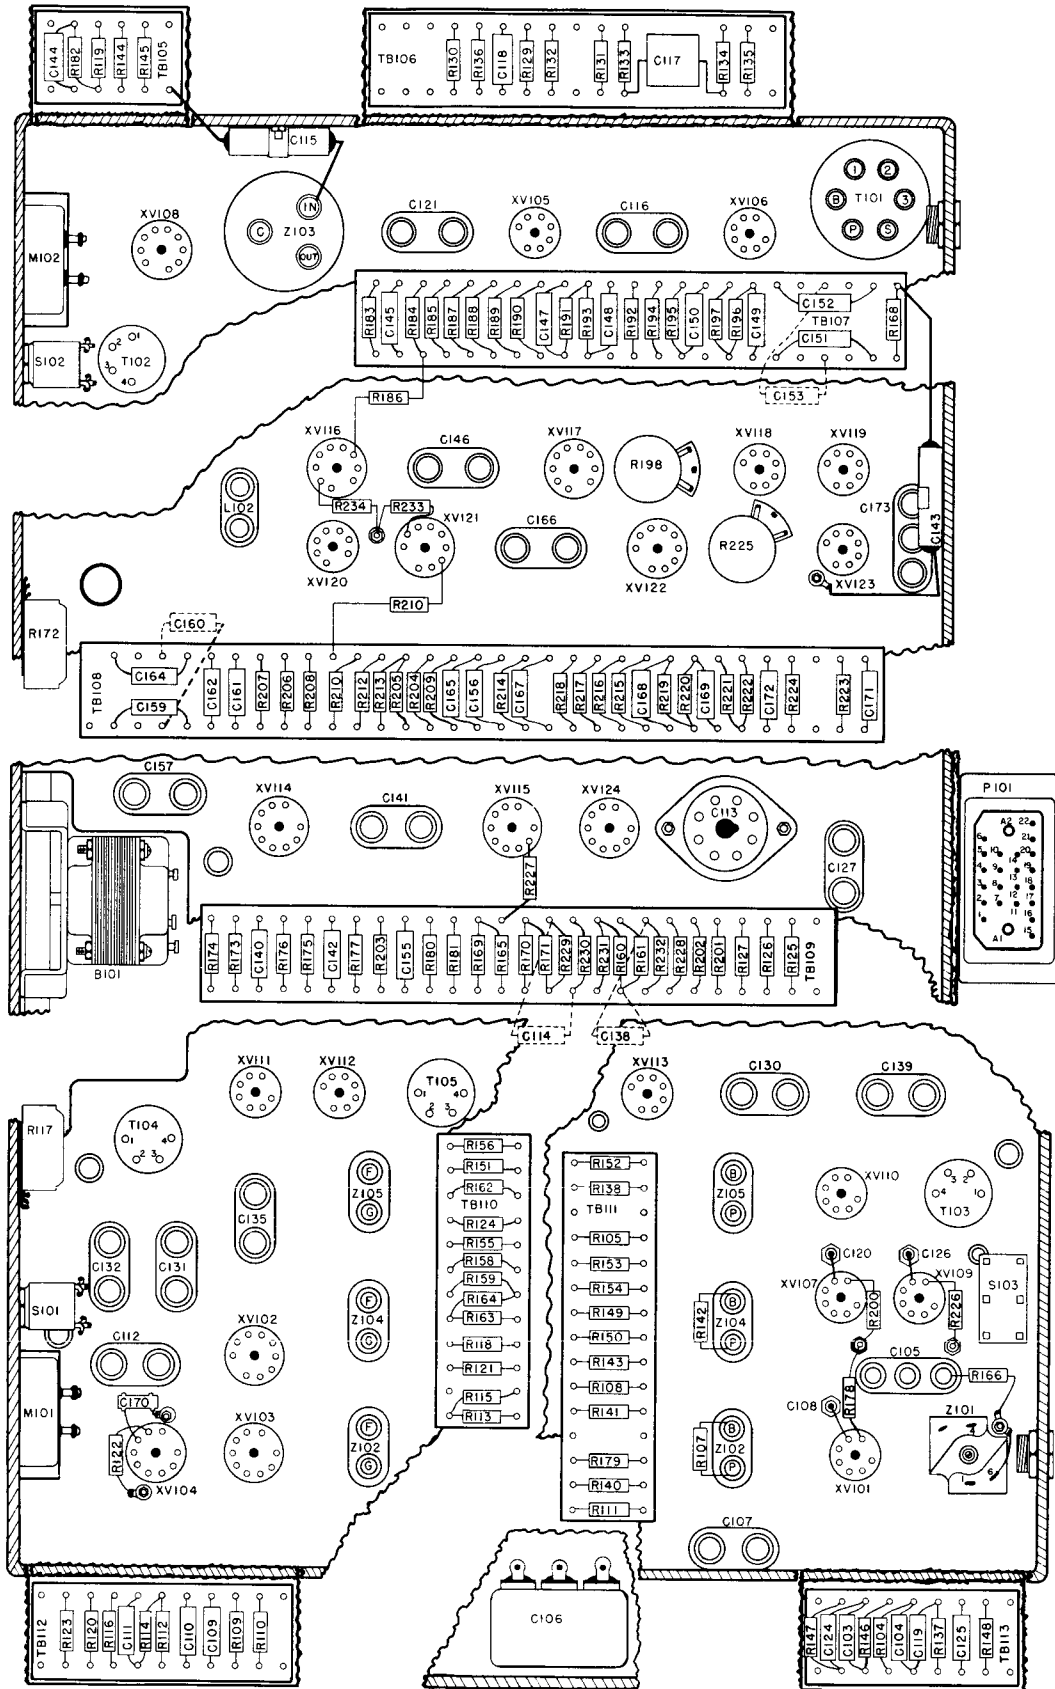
Component Locations, Bottom of Chassis, Upper Unit
